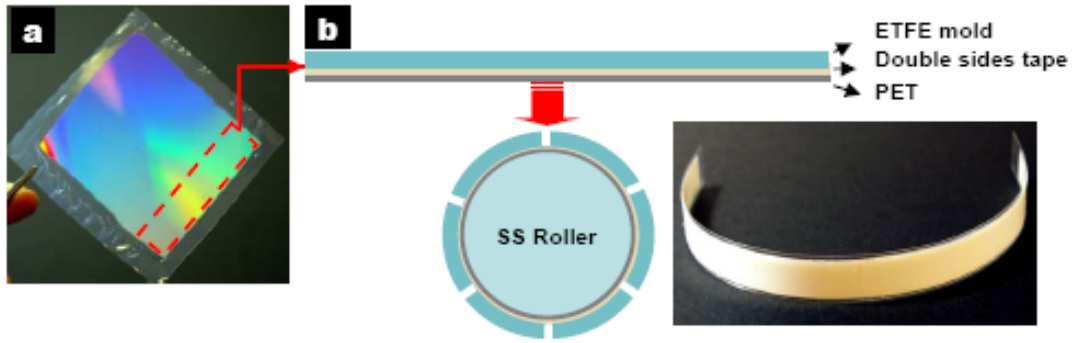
A flexible ETFE mold fabricated from an original Si mold. The ETFE mold assembly is prepared as shown in (b) and attached to a 60 mm diameter stain steel roller. A soft cushion layer is placed between the ETFE mold assembly and the roller surface for conformal contact during imprinting.
